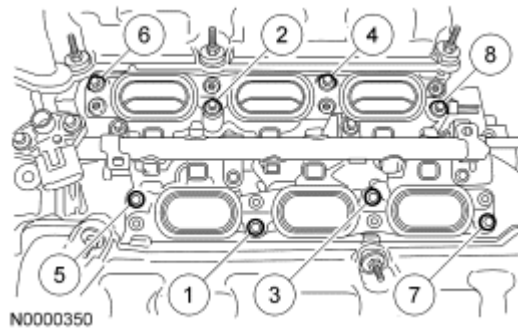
Identifying Tightening Sequence Of Lower Intake Manifold Bolts
